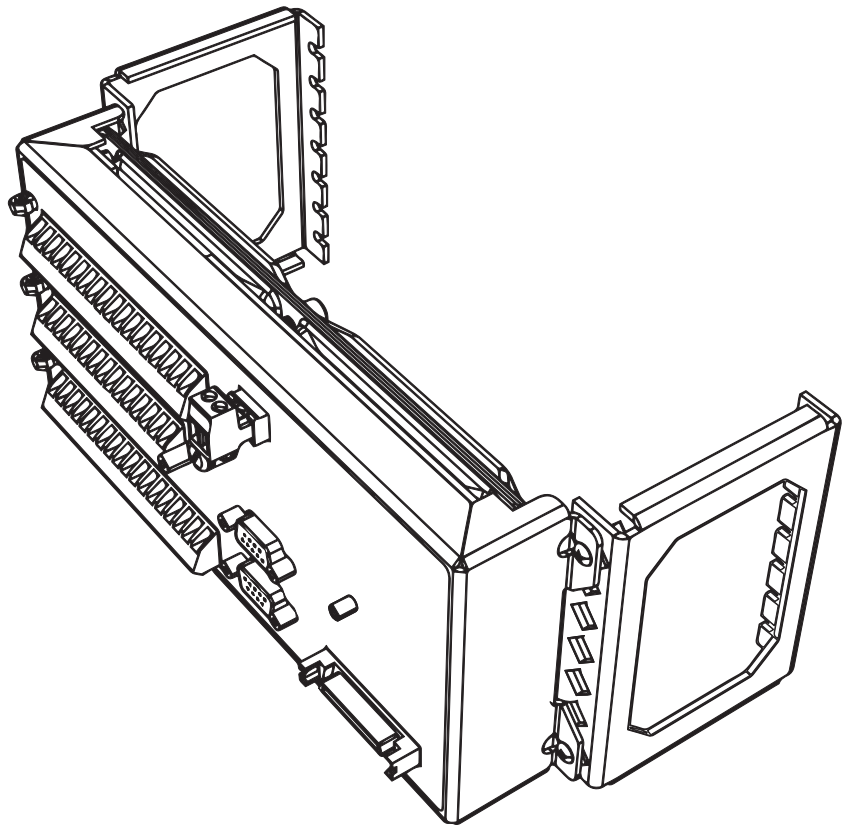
CR1000 mounted to Stack Mounting Kit legs
